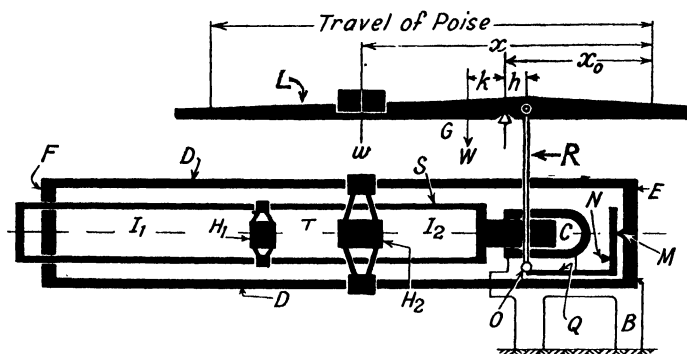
BUCKTON 100-TON HORIZONTAL TESTING MACHINE
